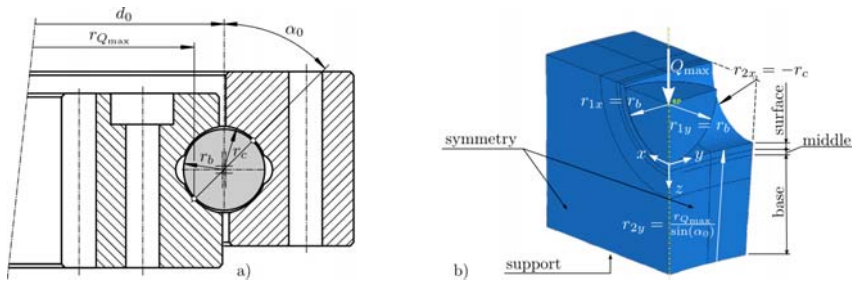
Geometry and loading of a bearing: a) important dimensions, b) FEA model
